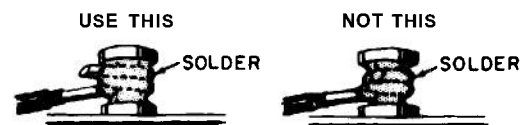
Soldering Wire to Terminal To Facilitate Removal
